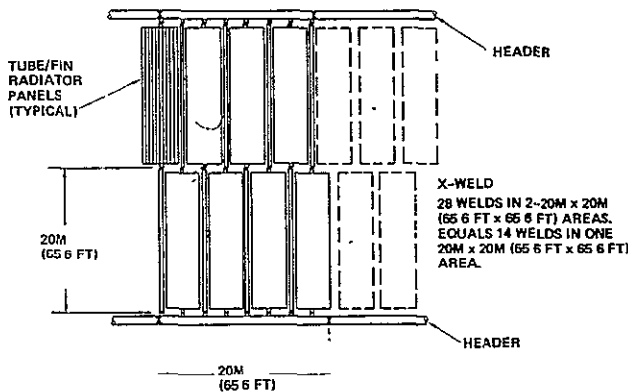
Radiator Welds Performed in Orbit
